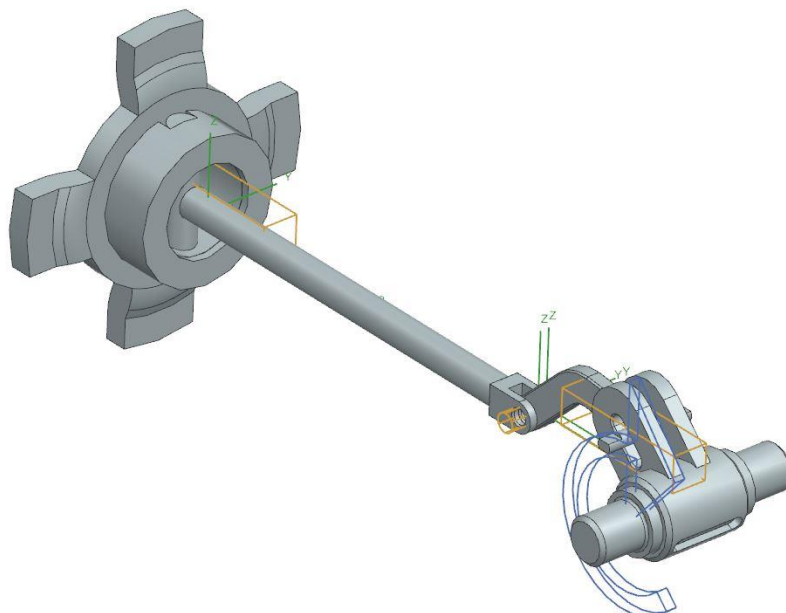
Simulation settings for the crank-rod-piston assembly. Source: Own elaboration.
